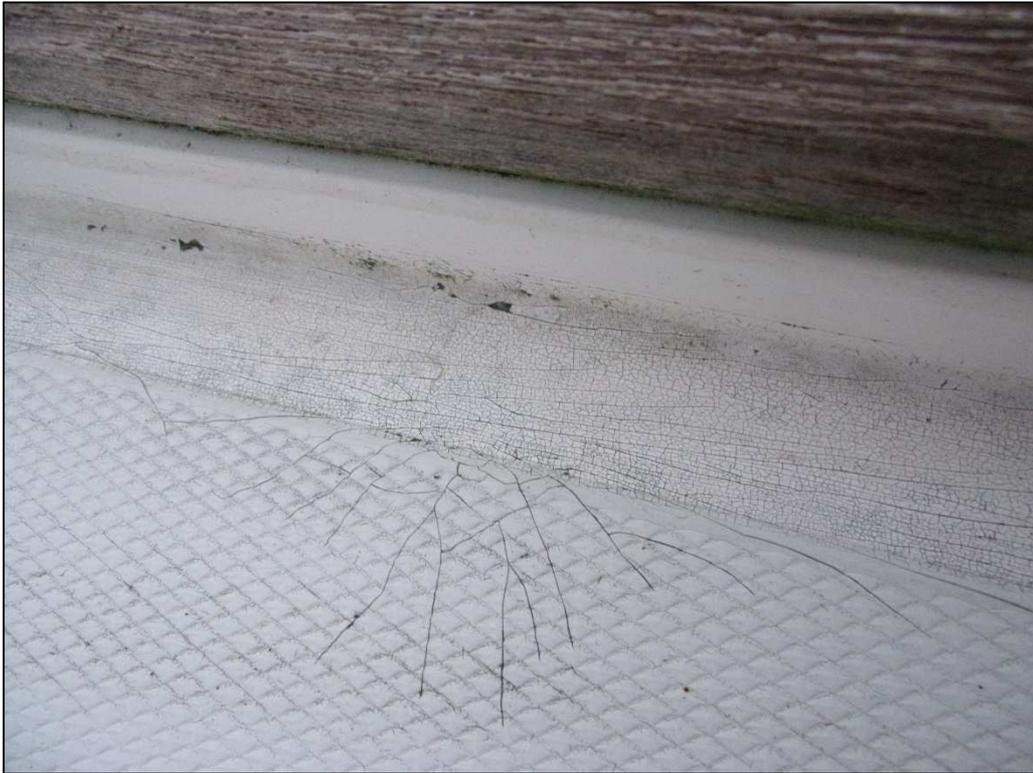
example of minor stress cracking at the deck edge.
